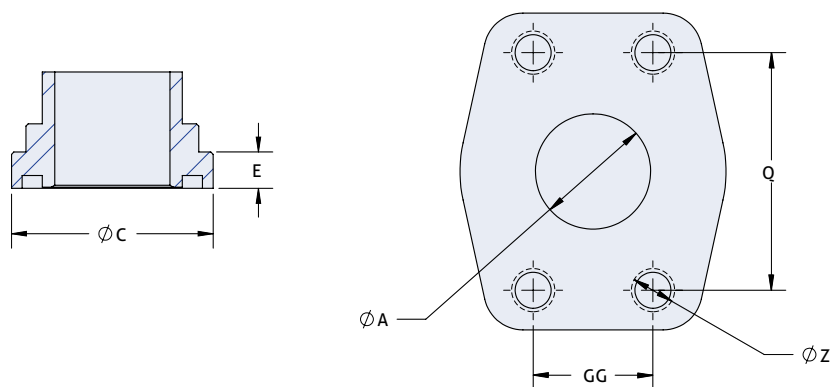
Code 61 and 62 Figures of the flange (Left) and bolt pattern (Right)
